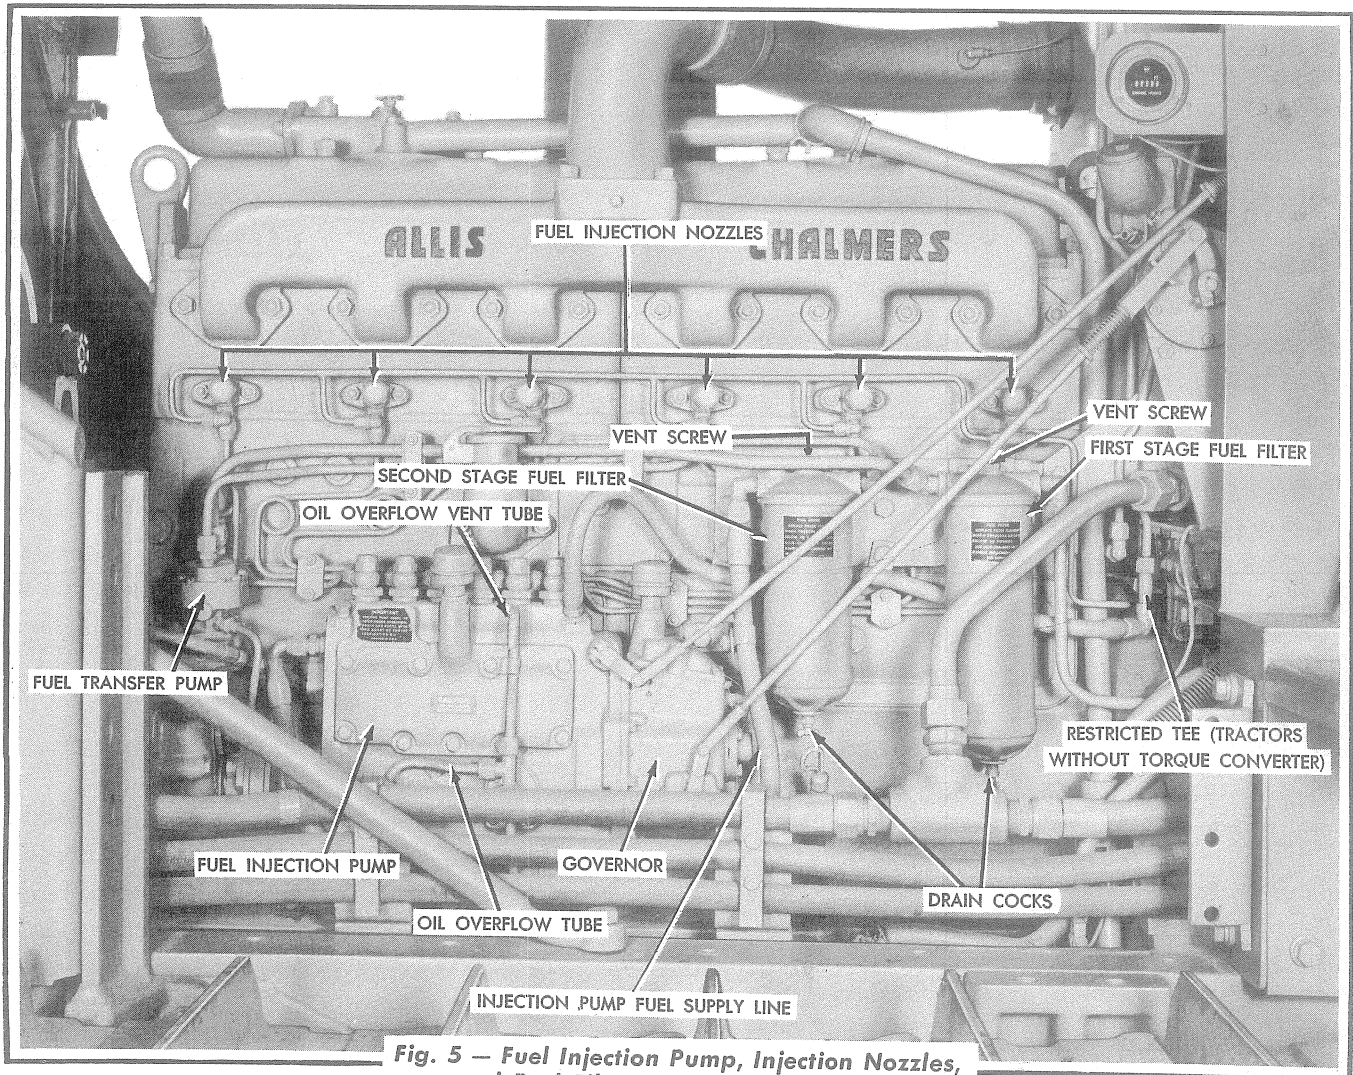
Fuel Injection Pump, Injection Nozzles, and Fuel Filters — Installed (Tractors Prior to Serial No. 4001)
